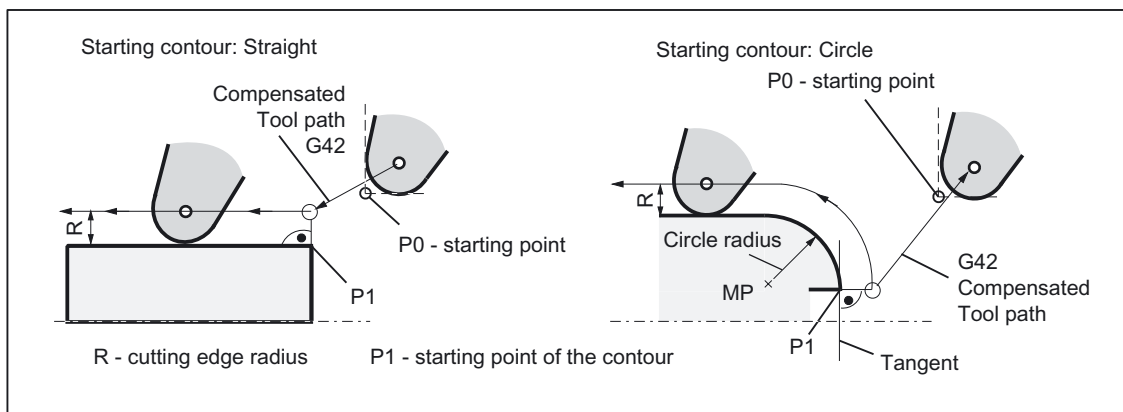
Start of the tool radius compensation with the example G42, tool point direction =3
